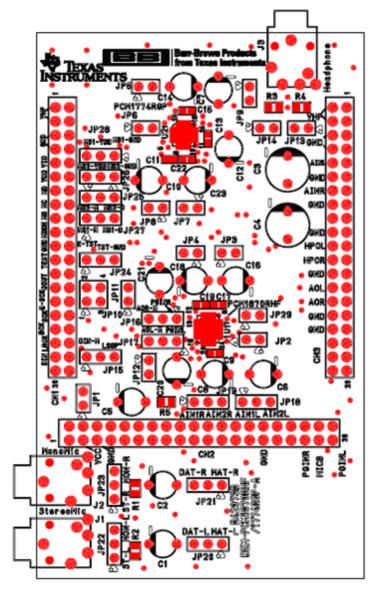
DEM-PCM1870RHF/1774RGP-A Board Layout—Silkscreen Side
